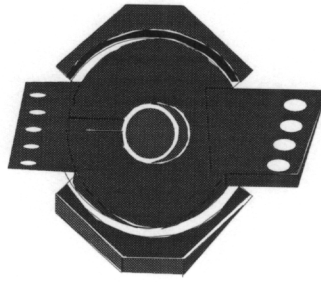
Low-profile transformer with multilayer PCB winding and modified RM10 core.
